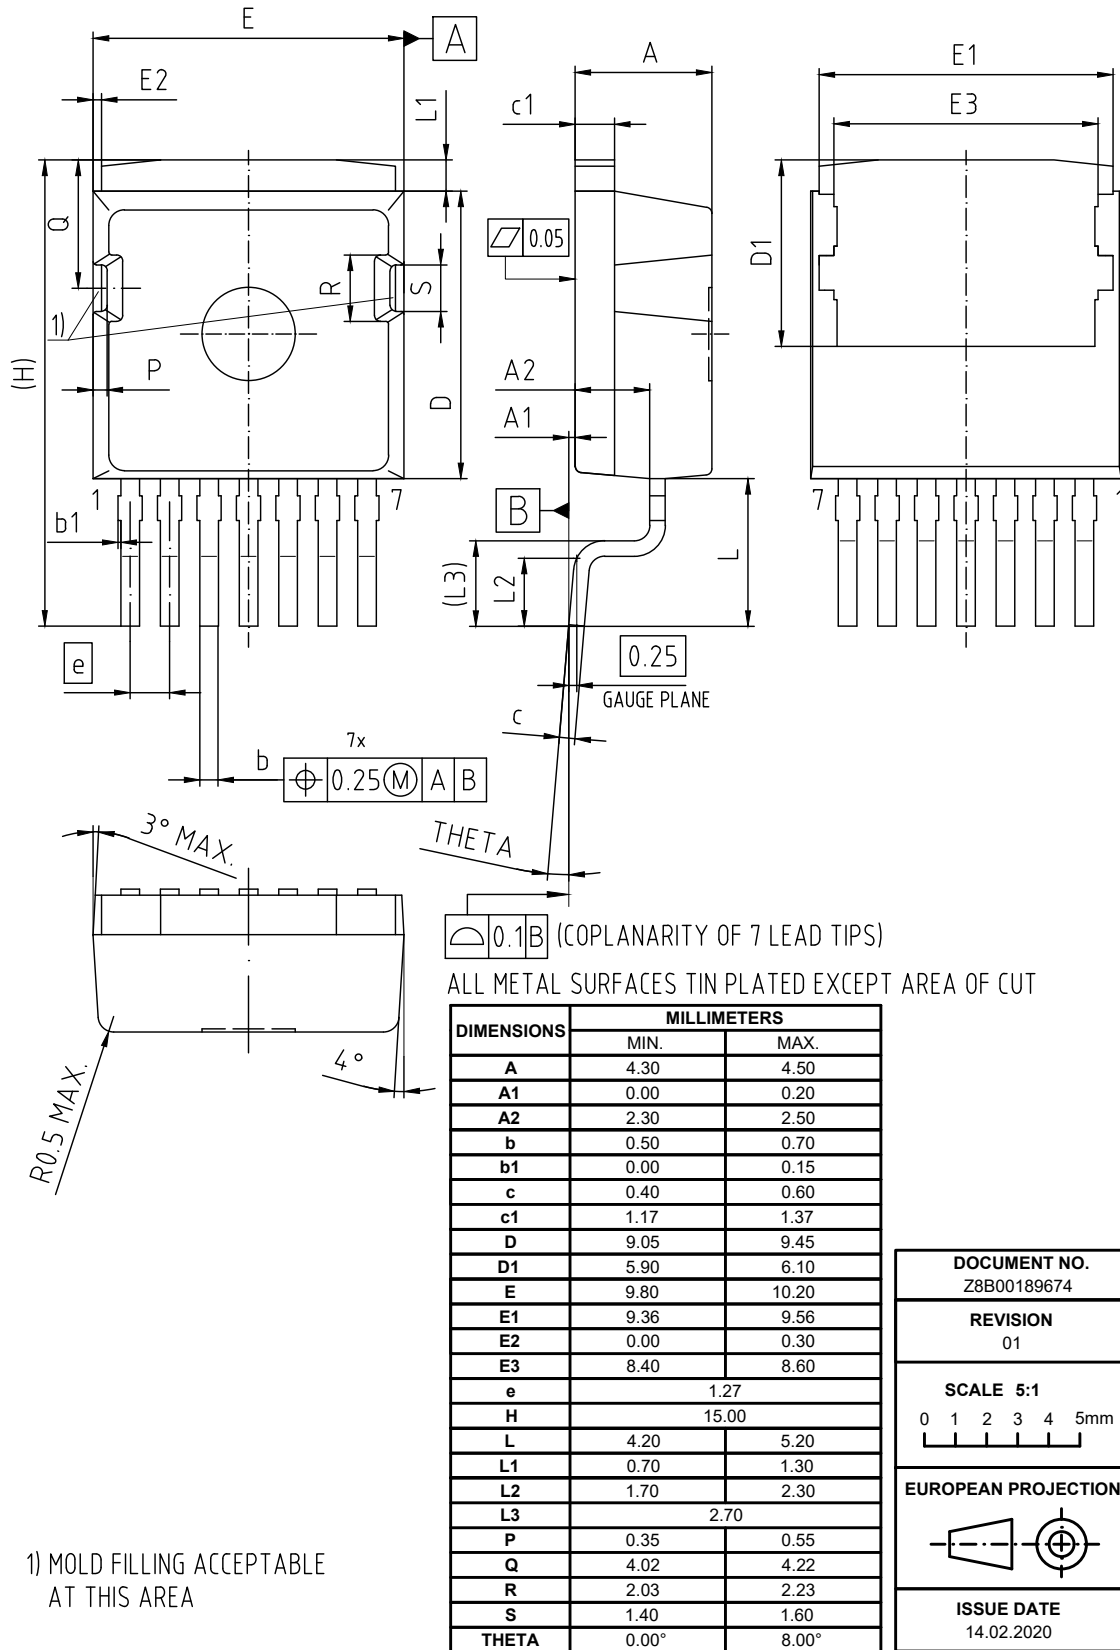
Outline PG-T0263-7-12, dimensions in mm
